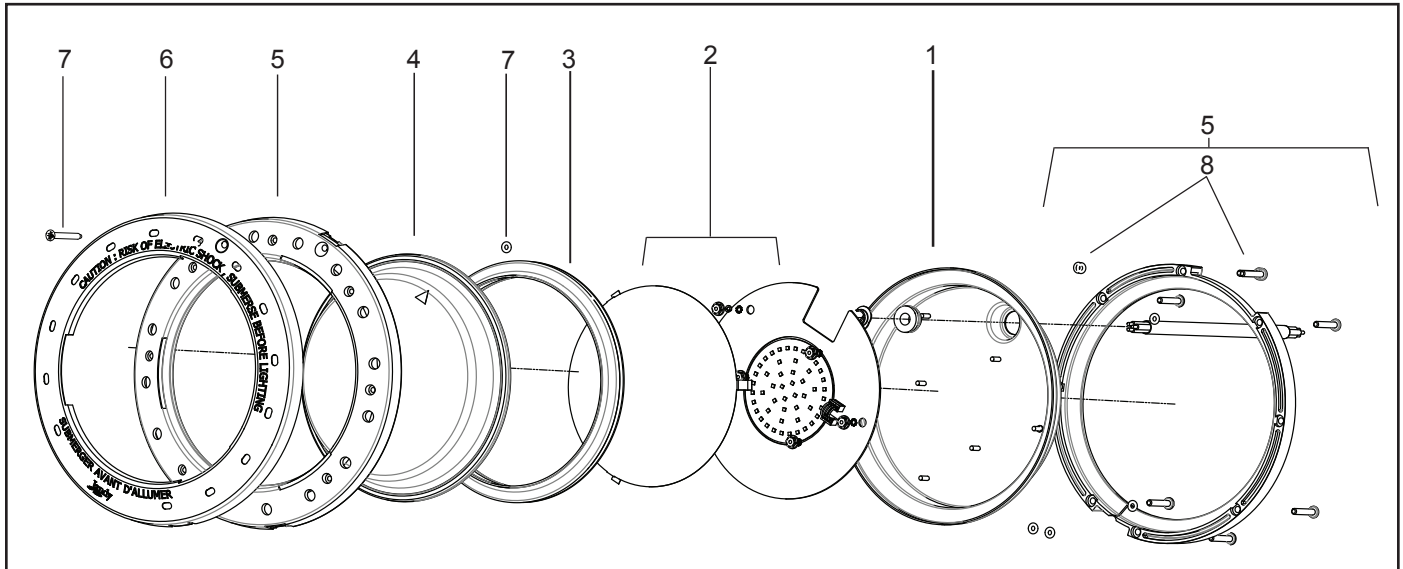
Jandy Pro Series Large White LED Light Exploded View
